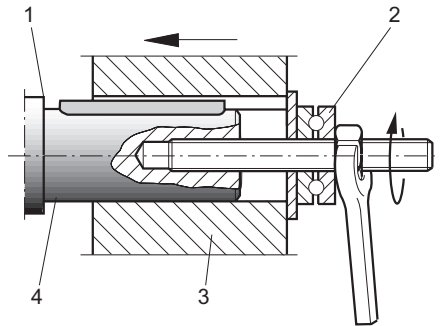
shows a sample mounting device for installing couplings (3) or hubs onto motor or gear unit shaft extensions (4). It may be possible to dispense with the thrust bearing (2) on the mounting device.
